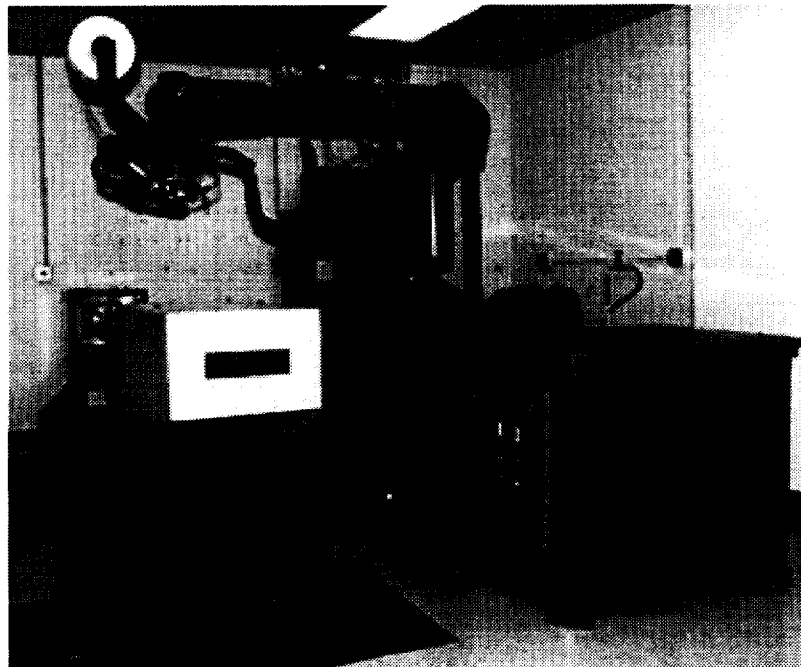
Photograph of NASA Robot, Heated Head and Heated Flat Tool.
